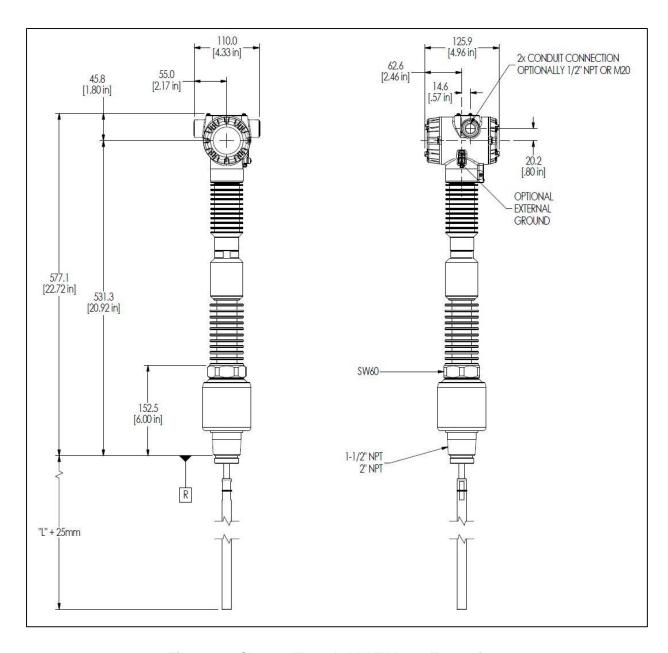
SLG726 Threaded NPT Mount Transmitter
